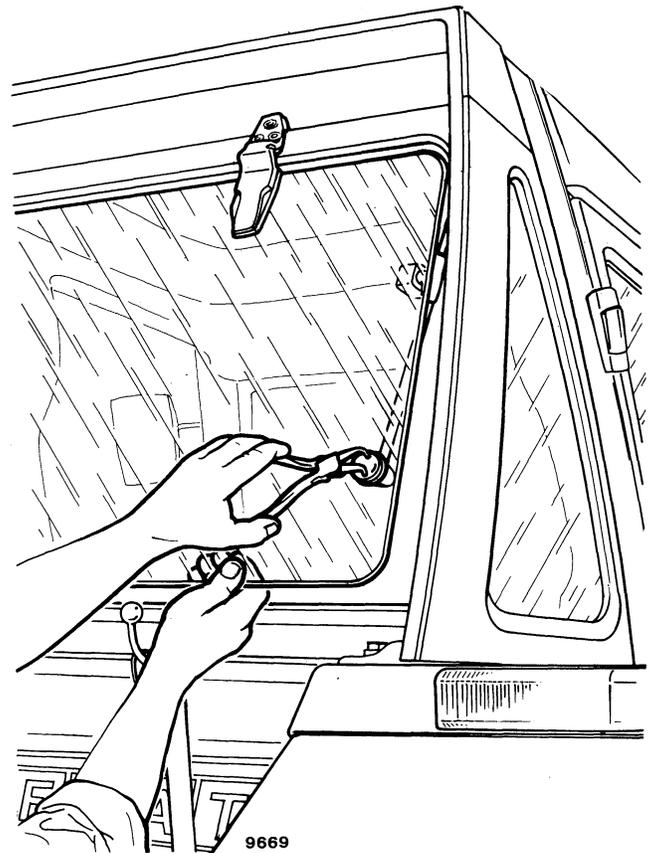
Disassembly - assembly of vertical rod lockrings
